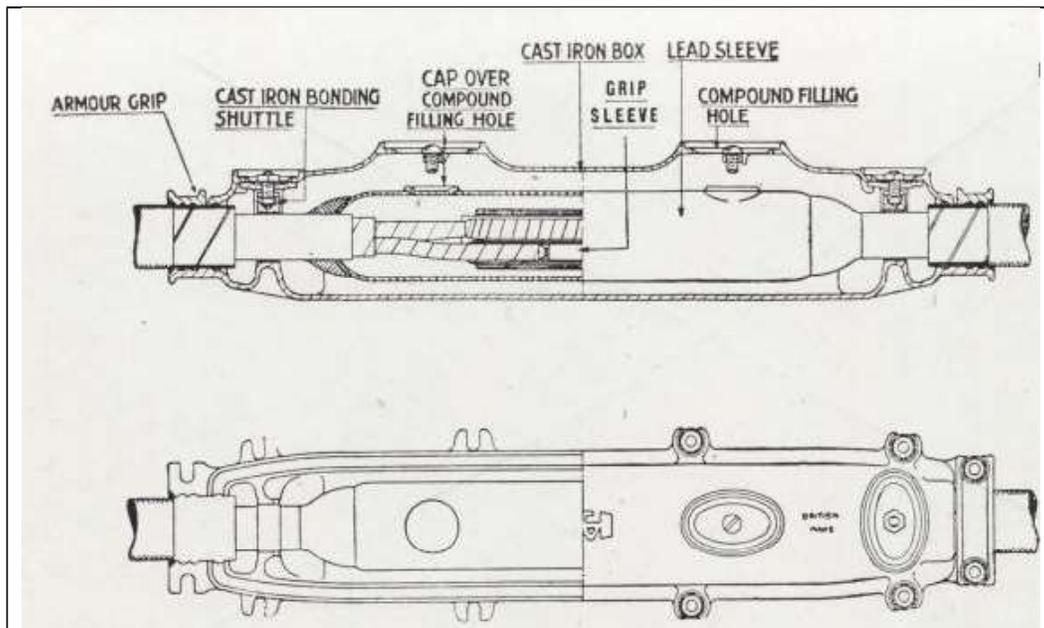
11 kV PILC three core straight joint: Cast iron shell type
